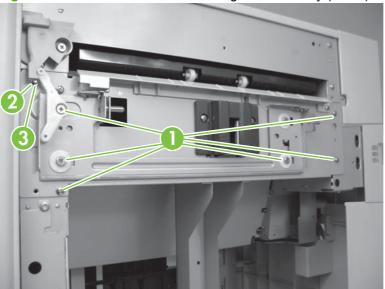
Remove entrance lower-guide assembly (2 of 2)
